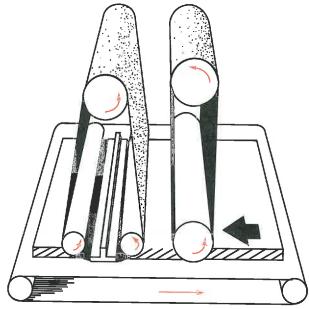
Double head sanders generally have both a platen and contact roller. The roller does the initial smoothing while the platen completes the surface. (*Timesavers*, *Inc.*)
